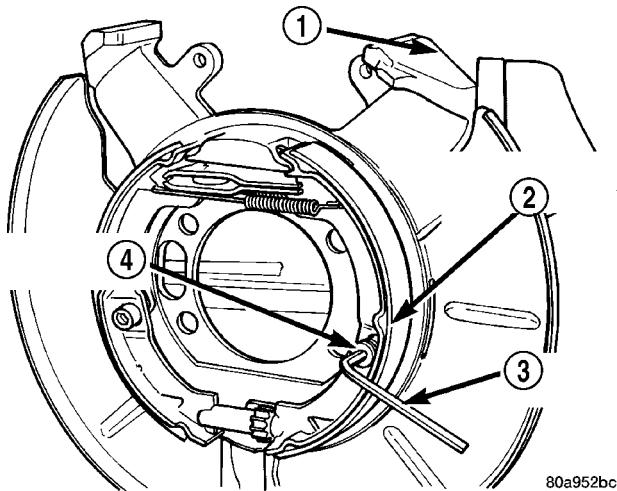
Leading Brake Shoe Hold Down Pin And Spring
